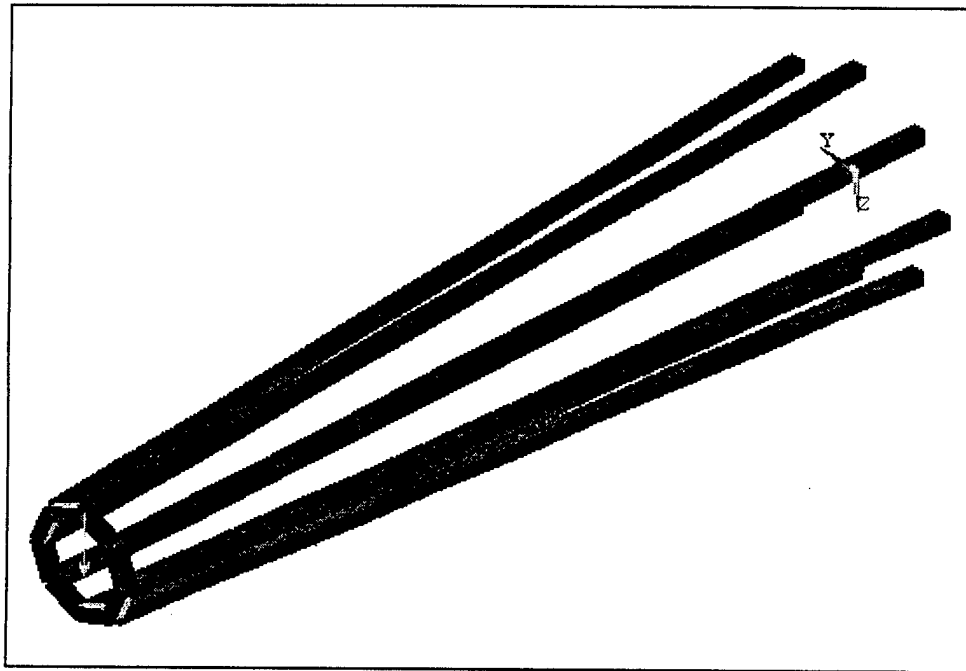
Finite Element Model of Wooden Boom Section
